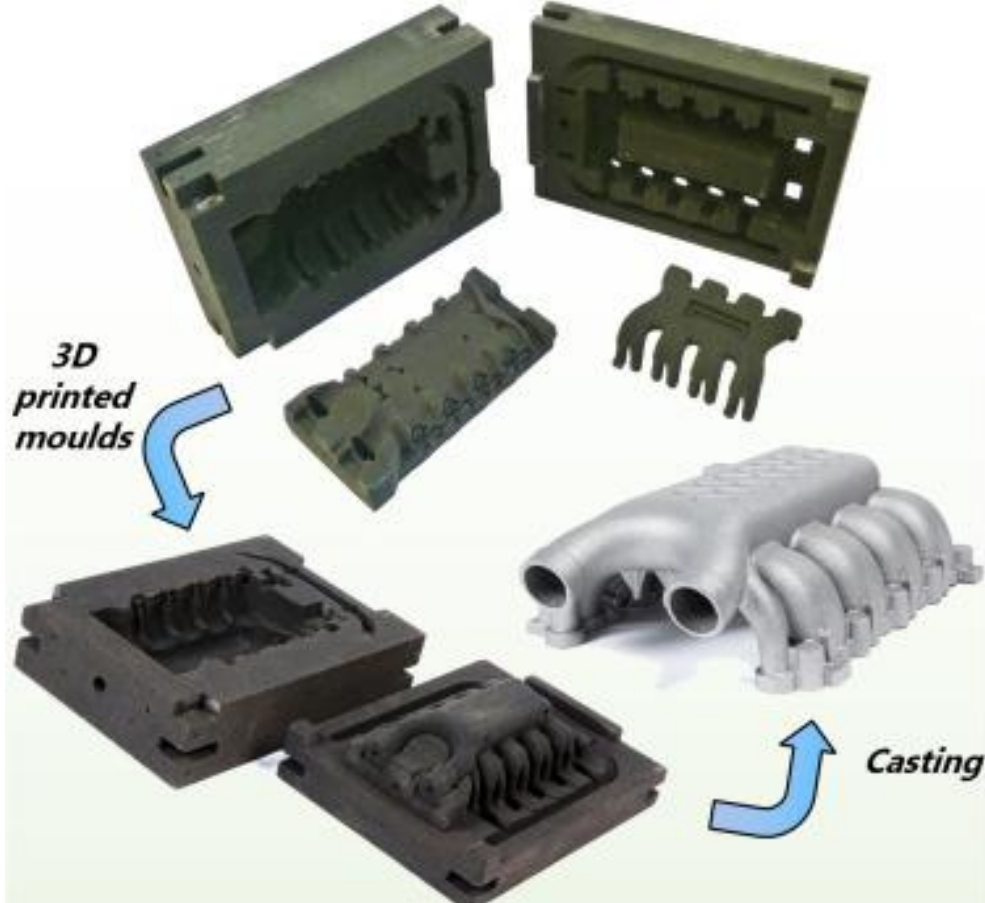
Open aluminum sand casting mold made using binder jetting on a Voxeljet vx200 platform. (Copyright Rapid Prototype and Manufacturing, LLC, Avon Lake, Ohio, 2014.)
